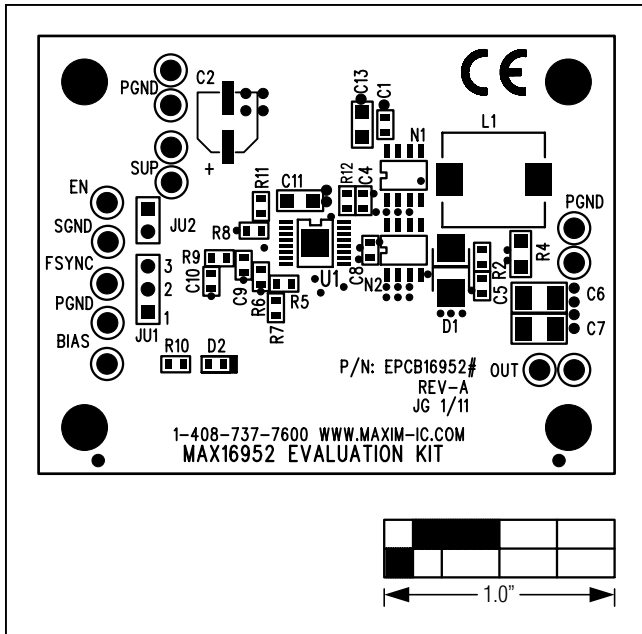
MAX16952 EV Kit Component Placement Guide—Component Side
